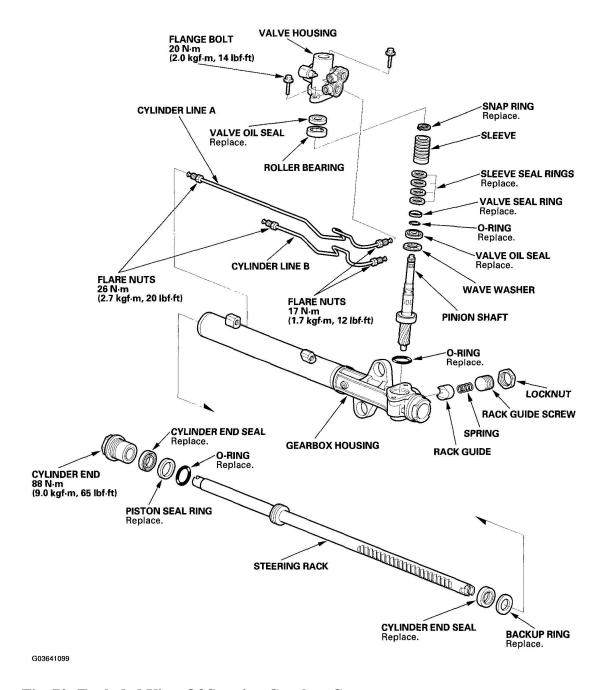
Exploded View Of Steering Gearbox Components Courtesy of AMERICAN HONDA MOTOR CO., INC.
